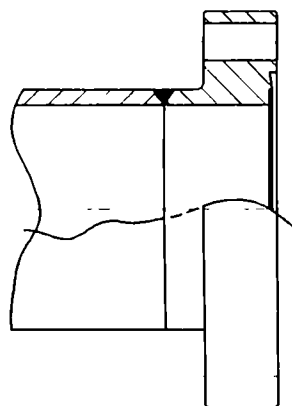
Butt weld attachment with fixed vacuum flange
